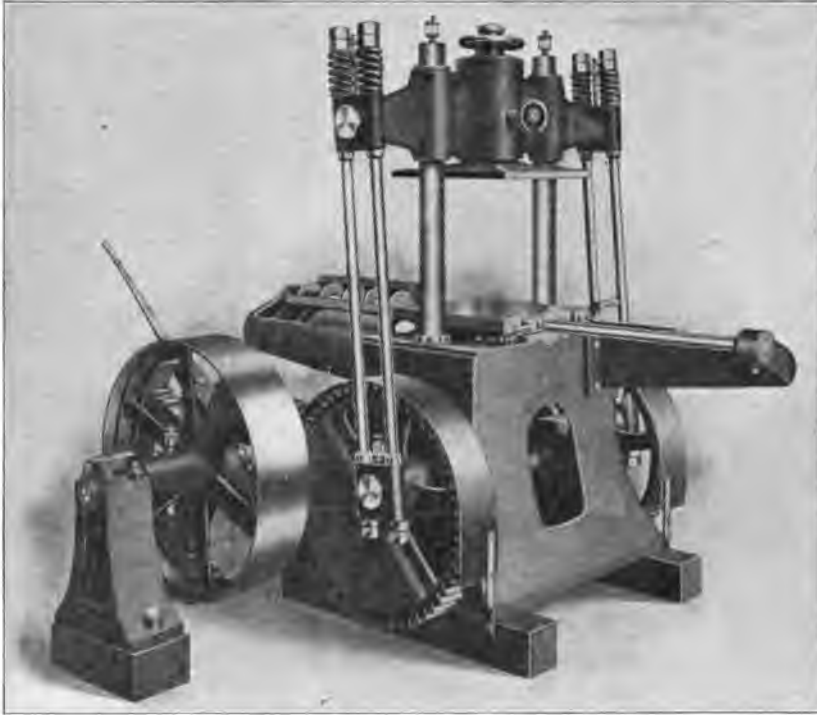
Trimmings Press, made by the American Clay Machinery Company.
